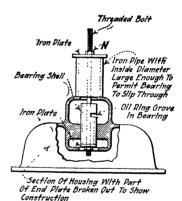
An effective method of removing a bearing shell from a motor end-shield. By tightening nut "N," the bearing shell is pulled out of the housing without injury.
